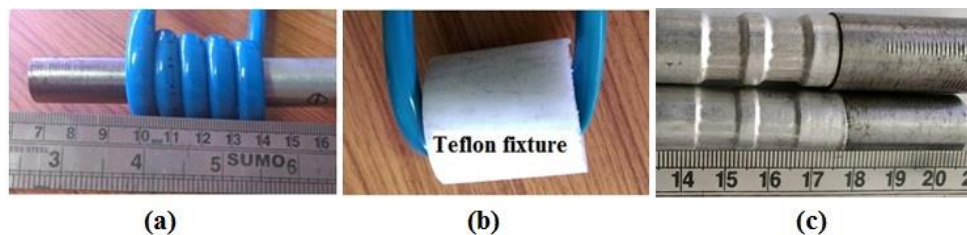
(a) Experimental setup (b) coil with Teflon fixture and (c) crimped sample
